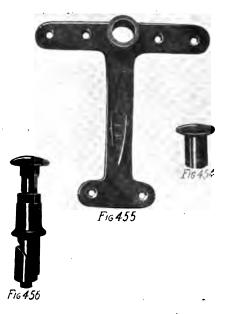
is a cap used to plug the hole: Fig. 455 is a new style front top iron; Fig. 456 detachable top iron stud The Victoria top is quite popular on cars for use in the city, as it has a striking appearance and is very adaptable for city use. The construction is identical to those tops that were used on carriages. The general form of construction is
